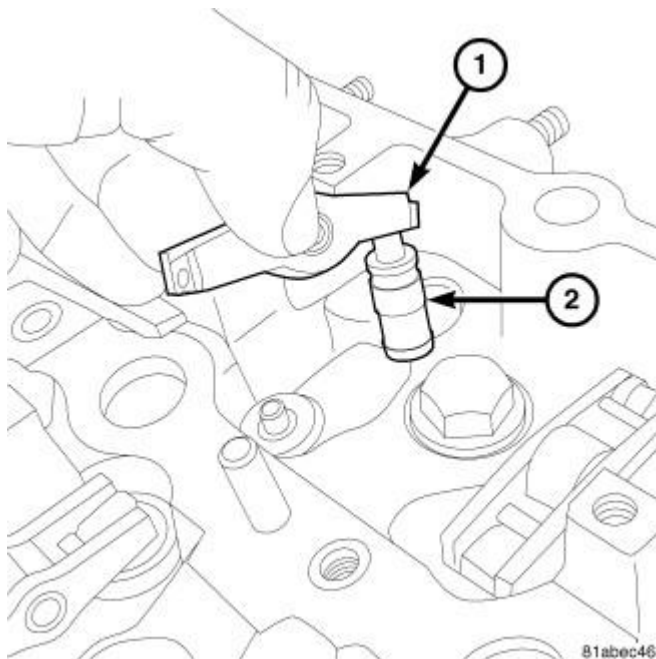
ROCKER ARM AND LIFTER ASSEMBLY
